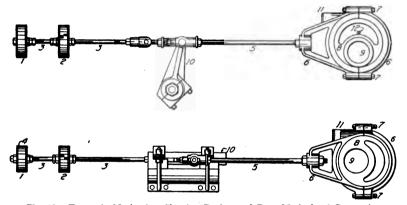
Eccentric Mechanism Showing Rocker and Ram Methods of Connecting Eccentric Rod with Valve Rod
